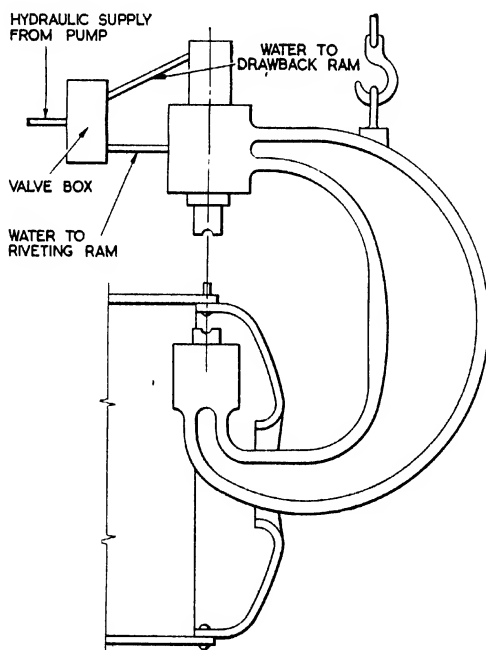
HYDRAULICALLY OPERATED RIVETING MACHINE,
